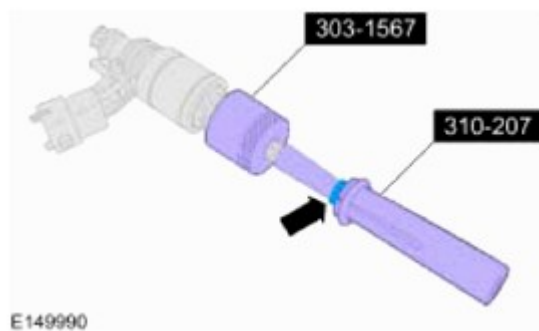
Sliding Teflon® Seals Off Of Arbor And Into Groove On Fuel Injectors Using Pusher
